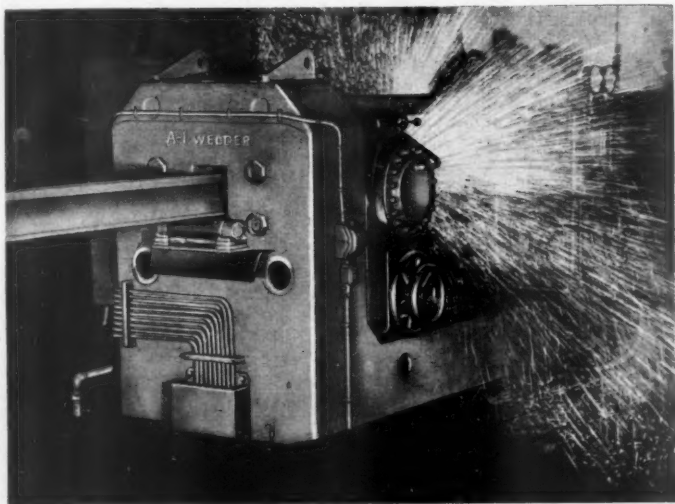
Modern flash welder for high speed welding of rails.
